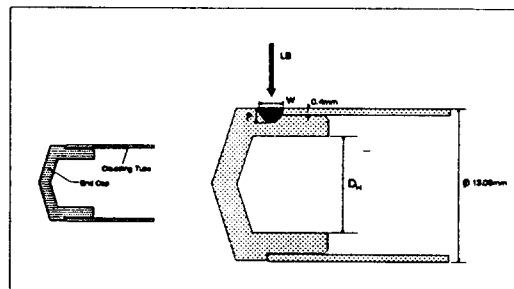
Joint geometry and experimental specimen for end cap welding.
